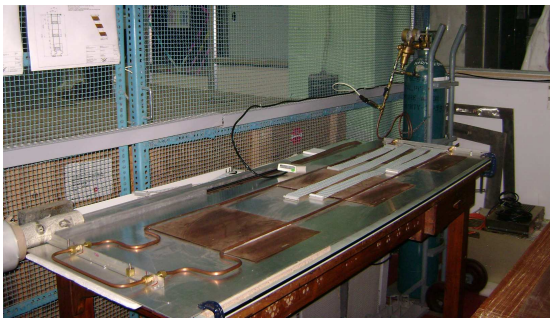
, Cu cooling assembly for a typical RE4/3 RPC, under leak test after fabrication at NPD-BARC
